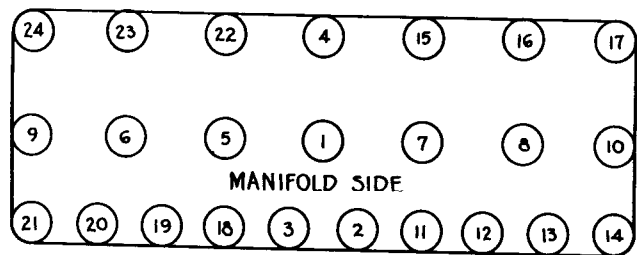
Illustration No. 4—Cylinder Head Tightening Order—J-15 Models
